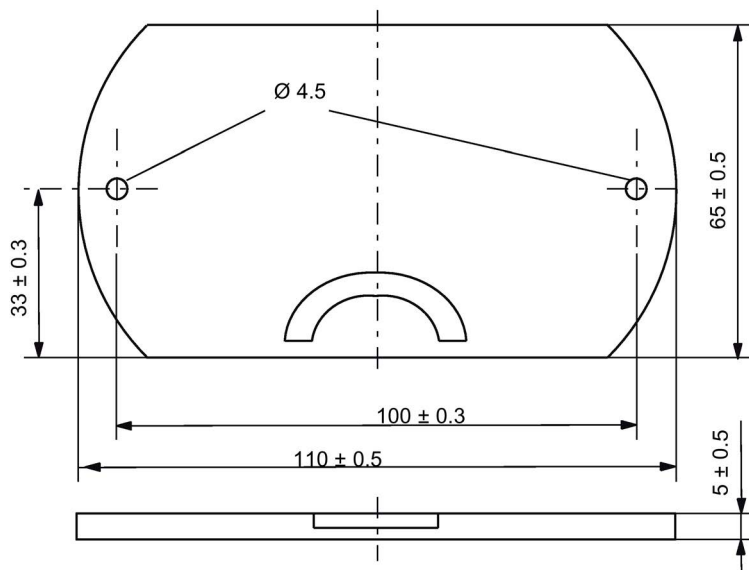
Dimension drawing of fixing pocket 6GT2390-0AA00
